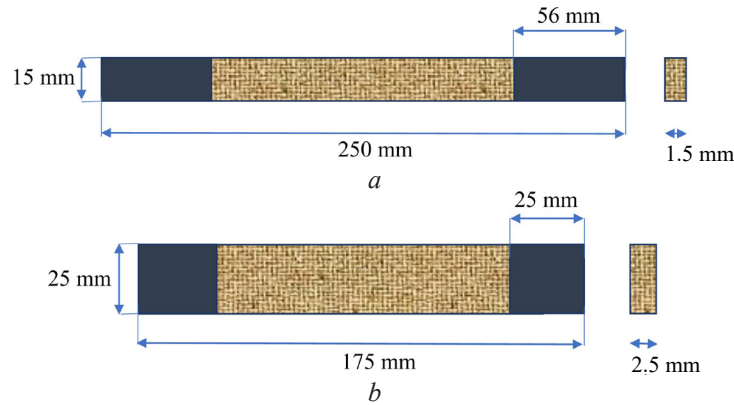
Standard test specimen: *a* – ASTM D 3039; *b* – ASTM D 790
